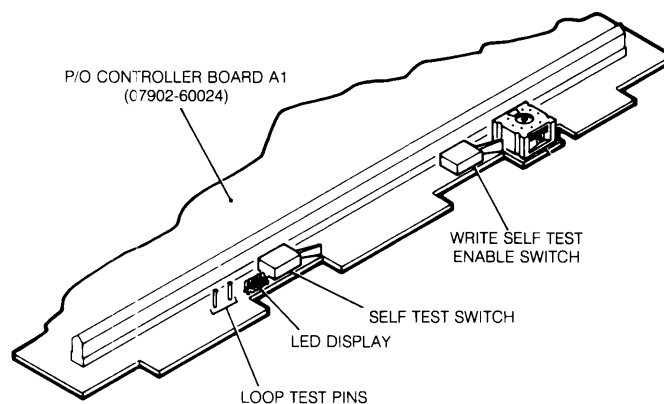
Controller Board A1 (07902-60024) Self-Test Controls and Indicators
